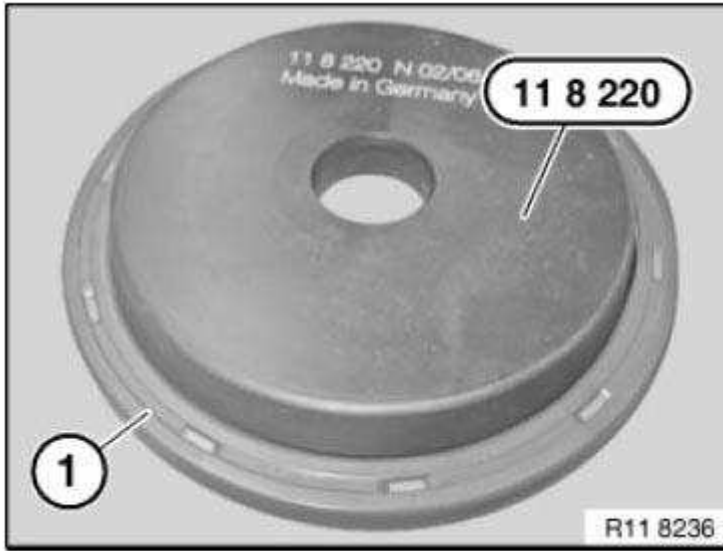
Identifying Radial Shaft Seal On Special Tool 11 8 220
